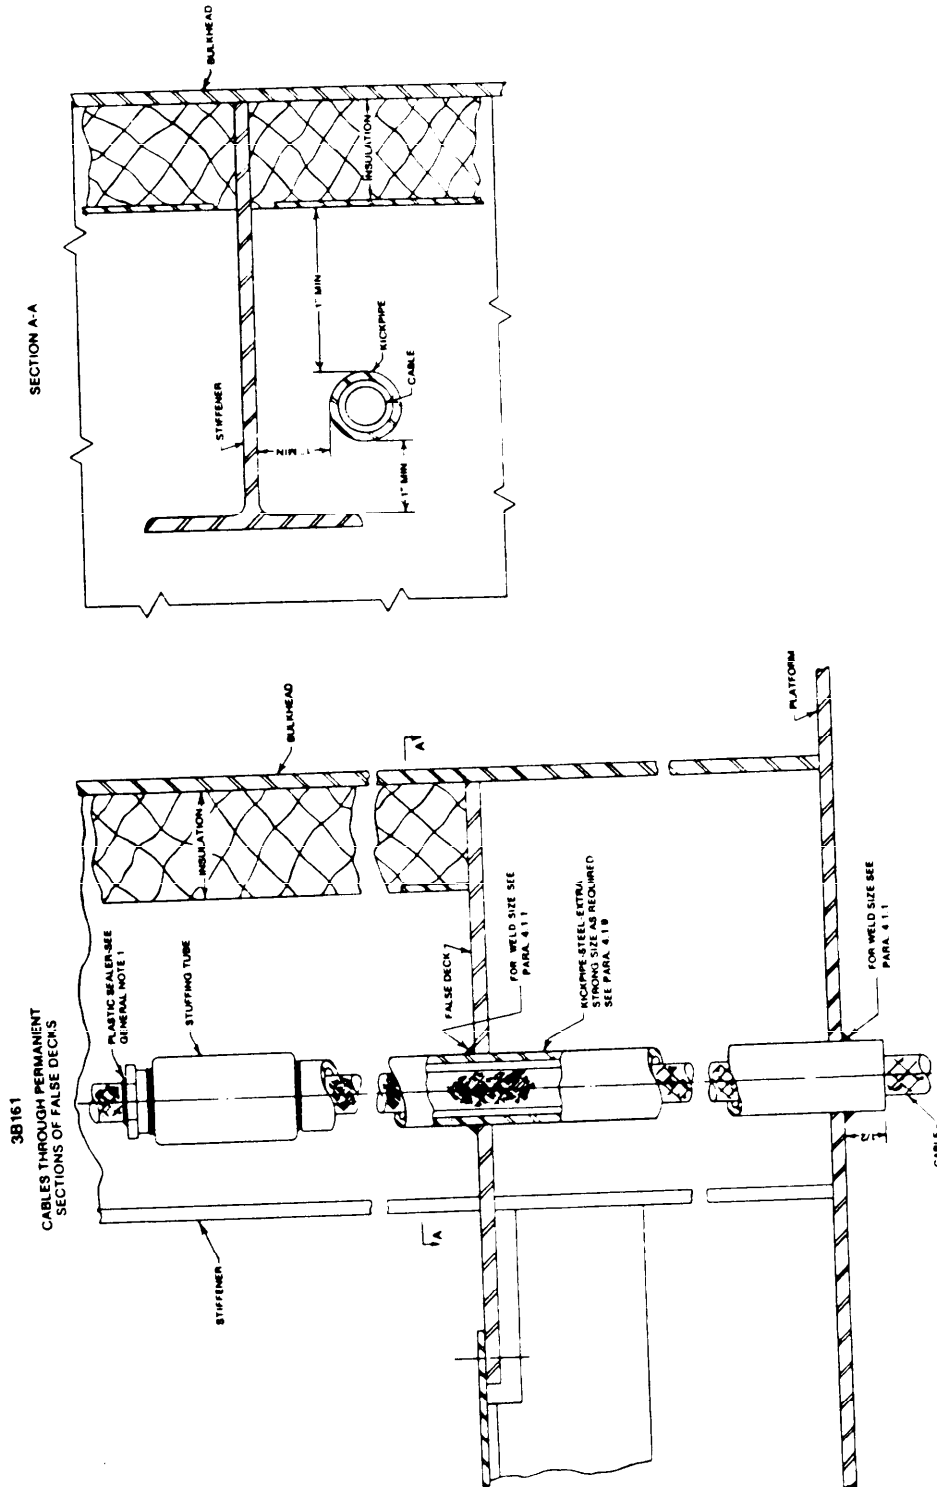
B16. Stuffing tubes through false decks (surface ships).
